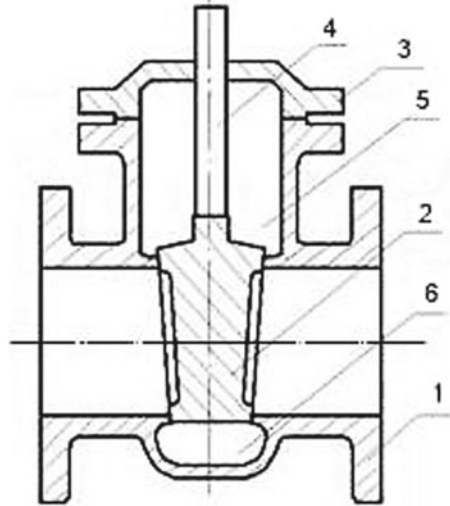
Valve section: 1—body; 2—wedge; 3—cover; 4—rod; 5—cavity under the cover; 6—lower cavity
